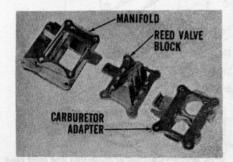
View of manifold, reed valve block with six reeds and carburetor adapter used with dual carburetor MC-40 and MC-70 models. Refer to Fig. MC21 for exploded view of reed valve block for single carburetor MC-30 engine which is of similar construction.
